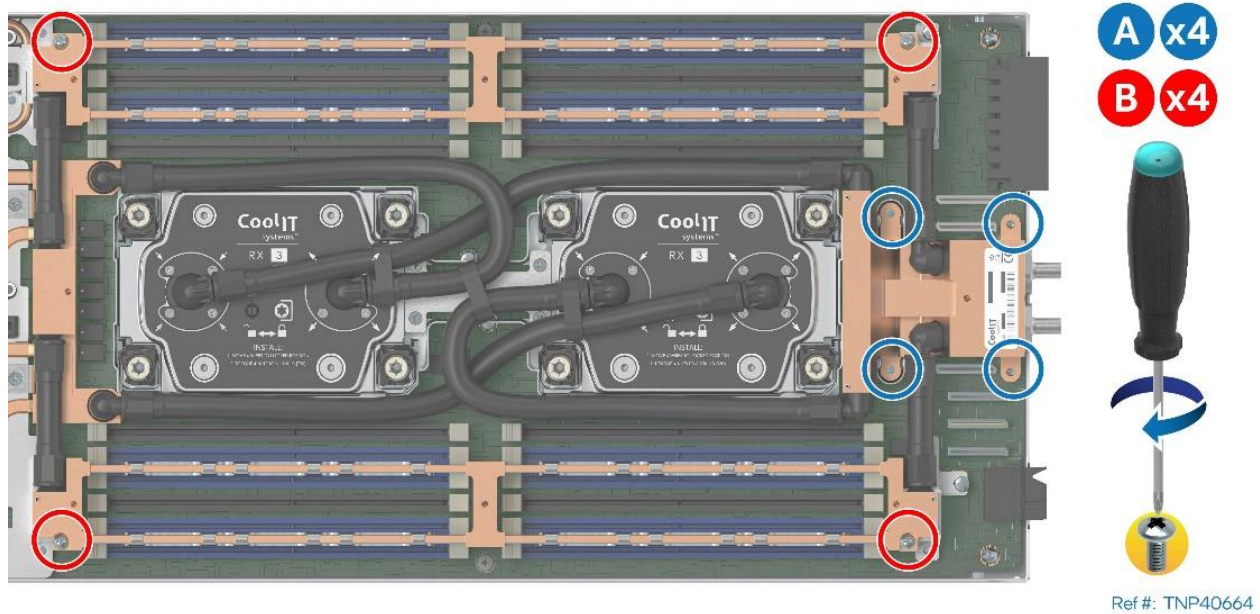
Securing the Quick Disconnect Block and Memory Cooler
